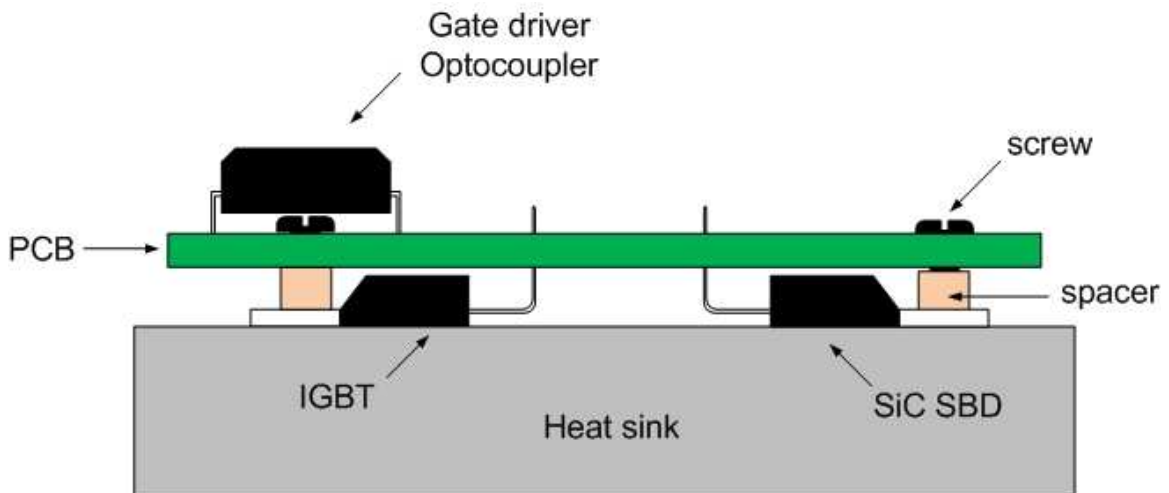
Side view of the PCB showing placement of the semiconductor devices between the heat sink and the PCB
